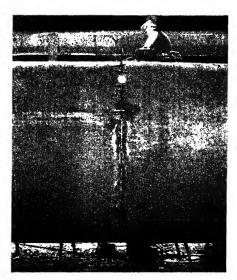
Wedge clamps control the rate of contraction in welding girth seams.
